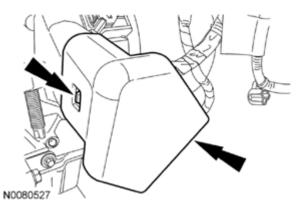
Locating Locking Tab And Generator Air Duct Courtesy of FORD MOTOR CO.
